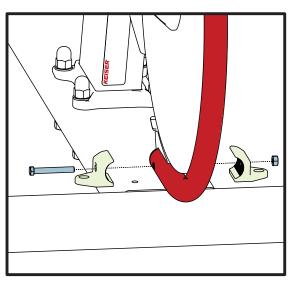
Align, Attach, and Tighten Flywheel Guard Brackets
